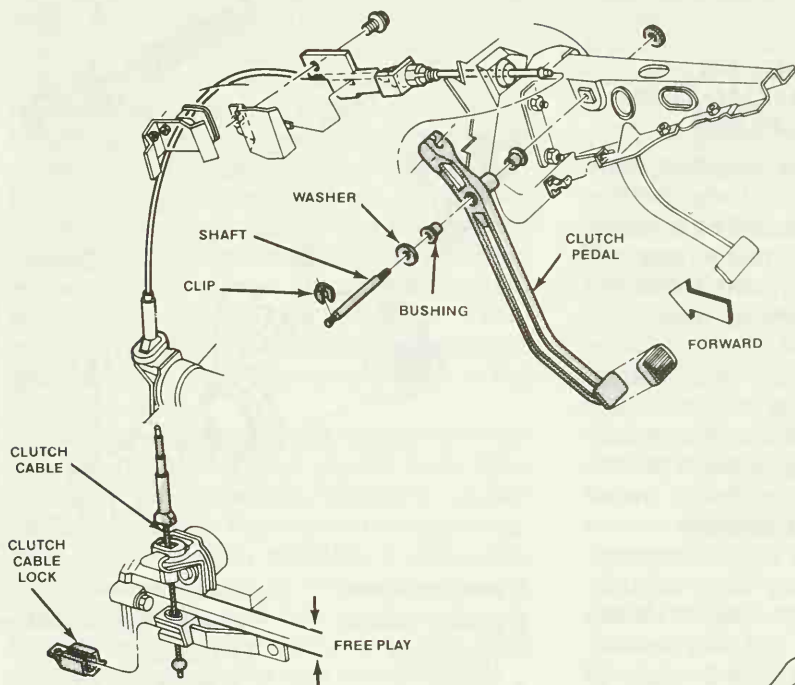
Adjustment parts for a cable-operated clutch. (Chrysler Corporation)
